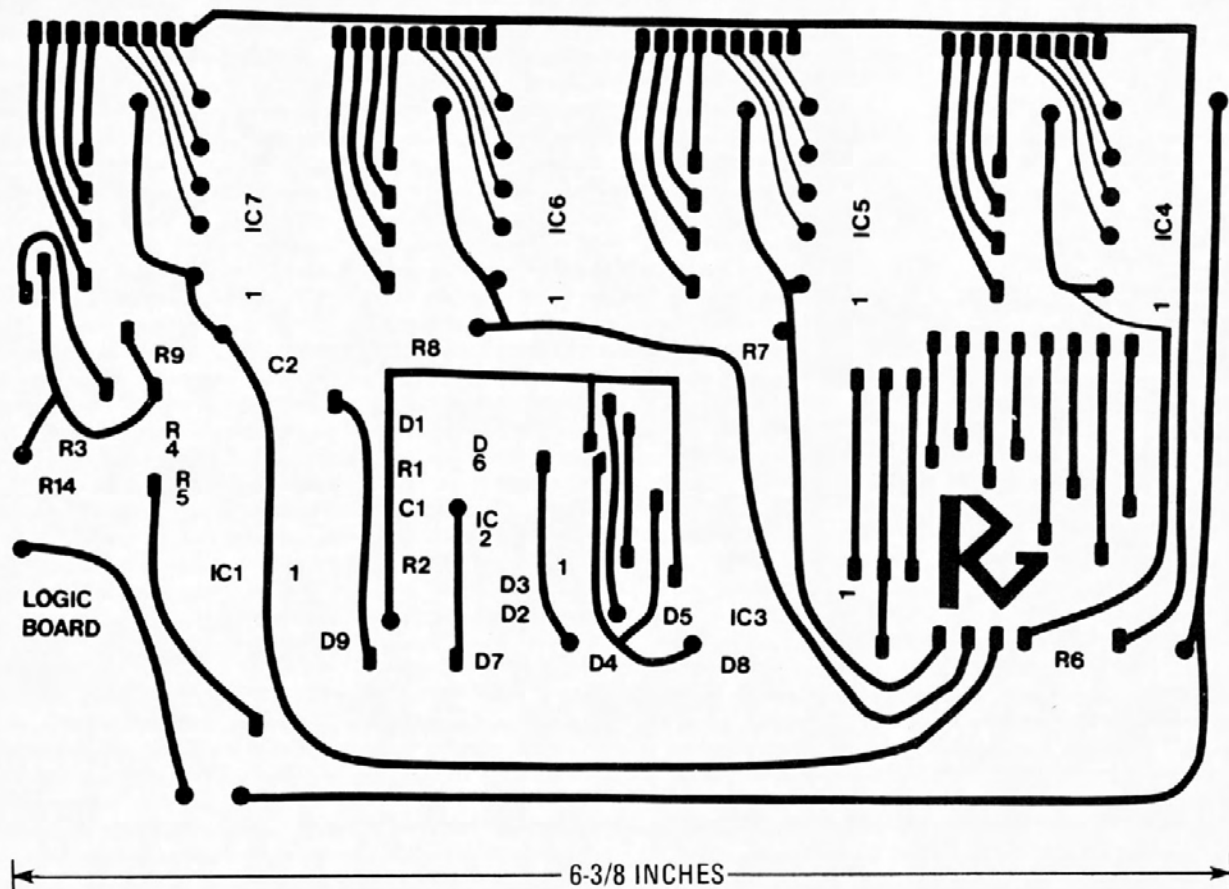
COMPONENT SIDE of the double-sided logic board. The board is shown full sized.
